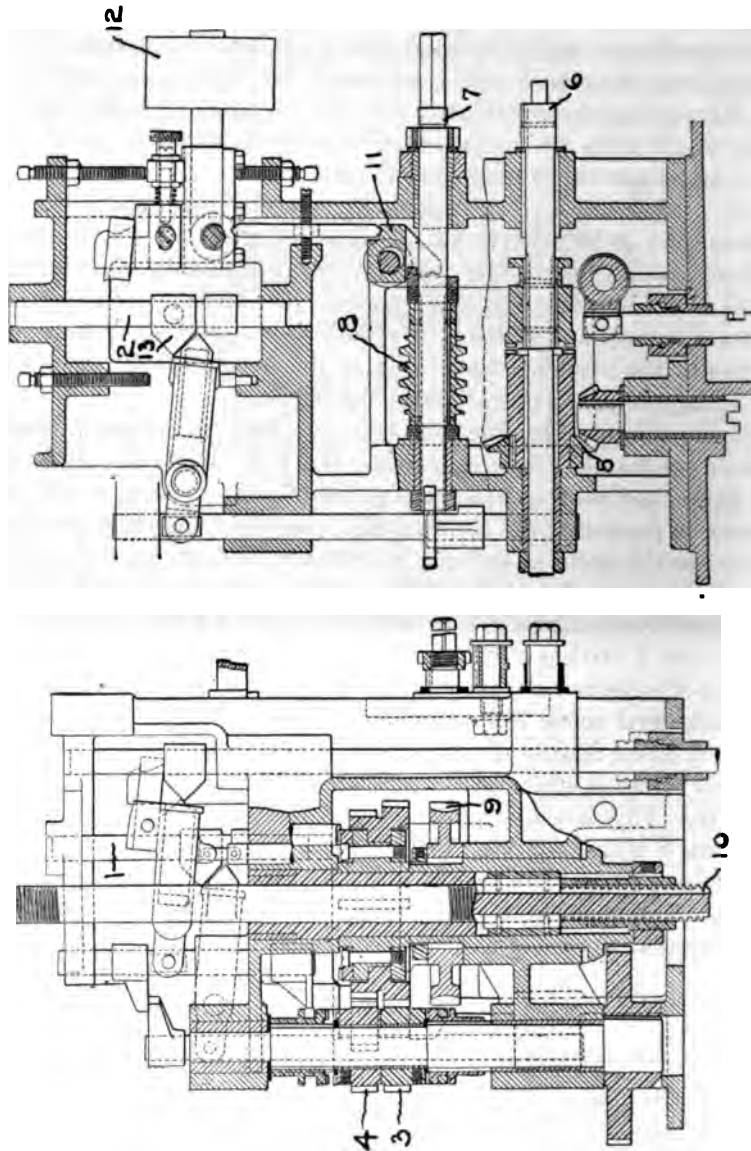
TOOL DEVICE HAVING THE FEATURE OF TRIPPING THE FEED IF PRESSURE ON TOOL BECOMES EXCESSIVE. BULLARD MACHINE TOOL CO.
